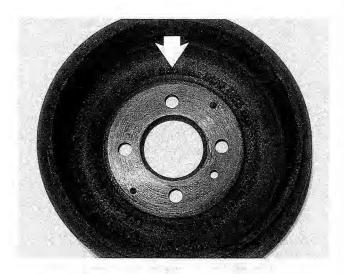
Rear brake drum showing location of stamped drum diameter specifications (arrow). Check diameter of drum at several points.
